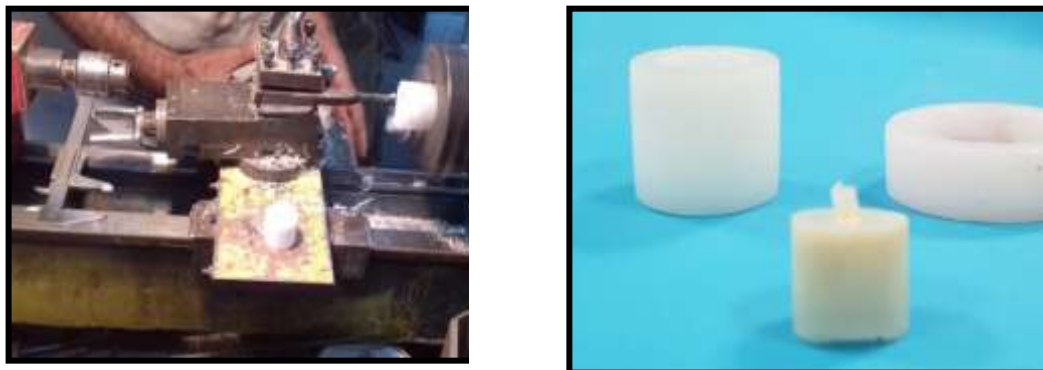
The milling machine and different parts of the cylindrical Teflon mold with the ring.
